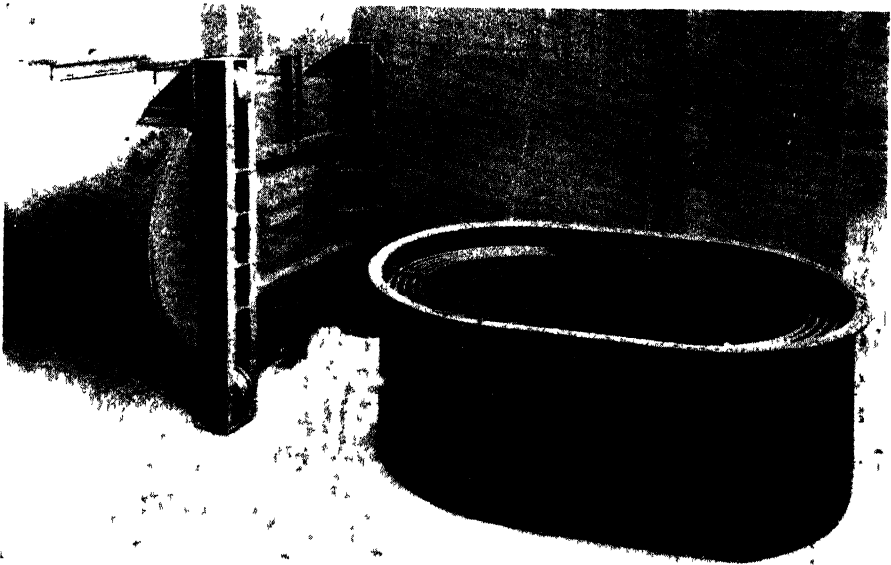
TYPICAL COOLING COIL AND TRANSFORMER TANK
